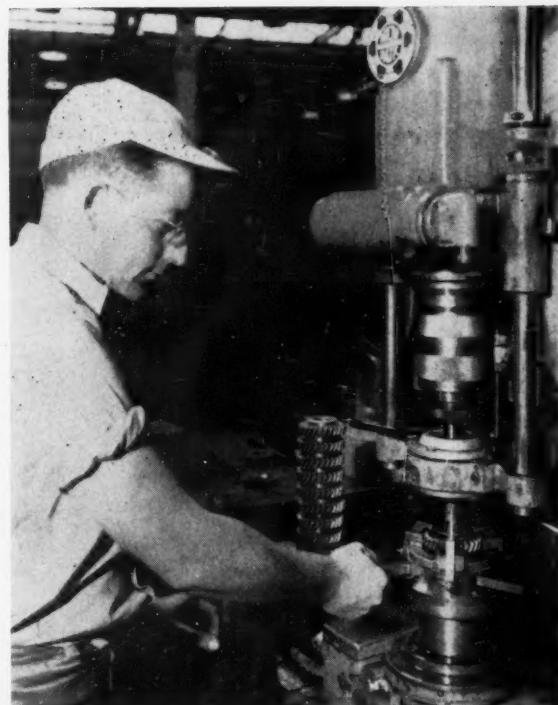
Spiral splines are honed in this Micromatic honing machine, a spiral guide being provided to guide the hone.
